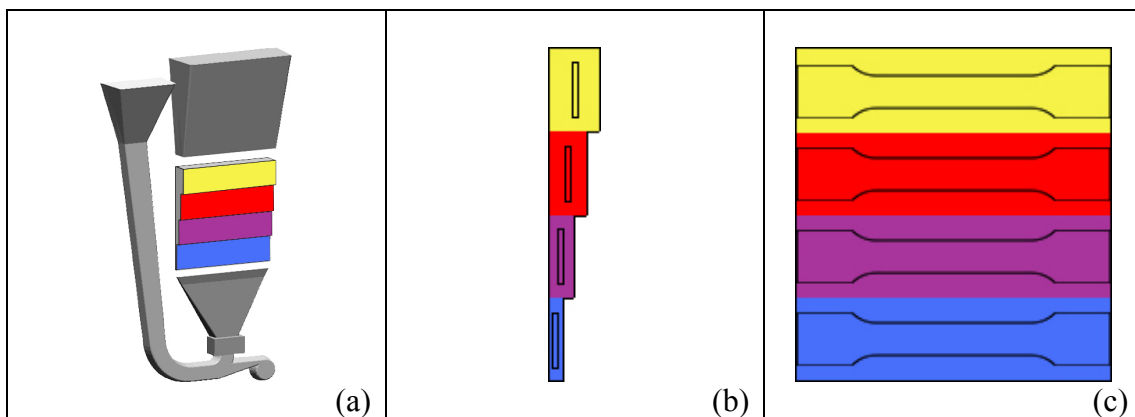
Resulting casting pattern which highlights (a) the steps and the discarded parts, and (b,c) the position from which the tensile specimens were derived.
